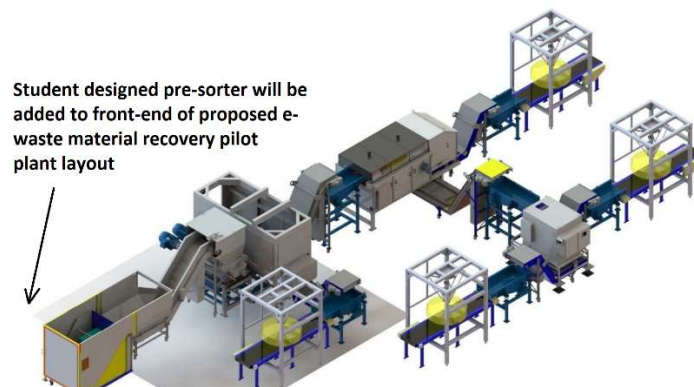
Layout of Next Generation Electronic Waste Recovery Pilot Plant
